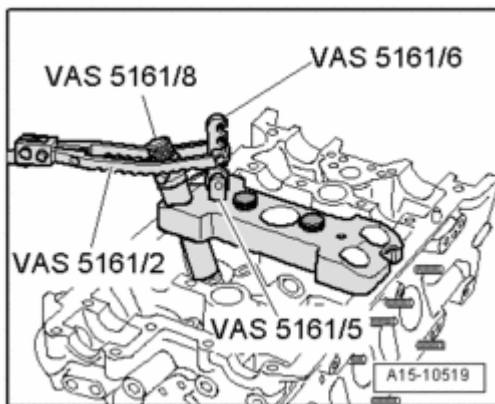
Installing Engaging Device VAS 5161/6 With Installation Fork VAS 5161/5 Into Guide Plate
